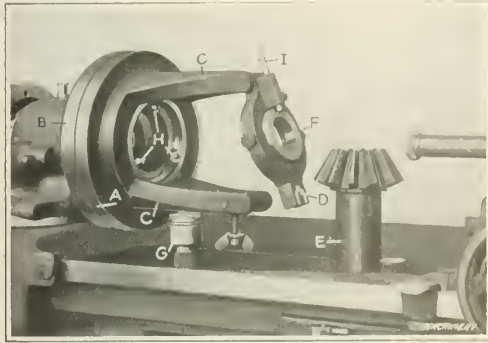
Chuck for holding Long Shank Bevel Gear for grinding
